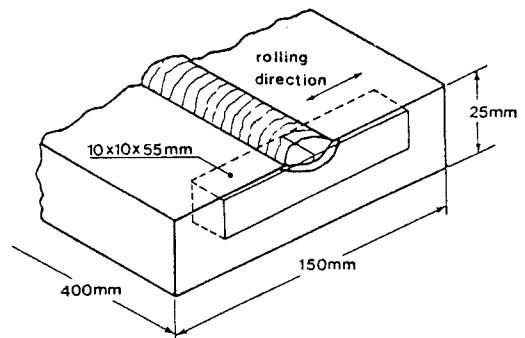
Welding plate configuration and extraction of specimens
